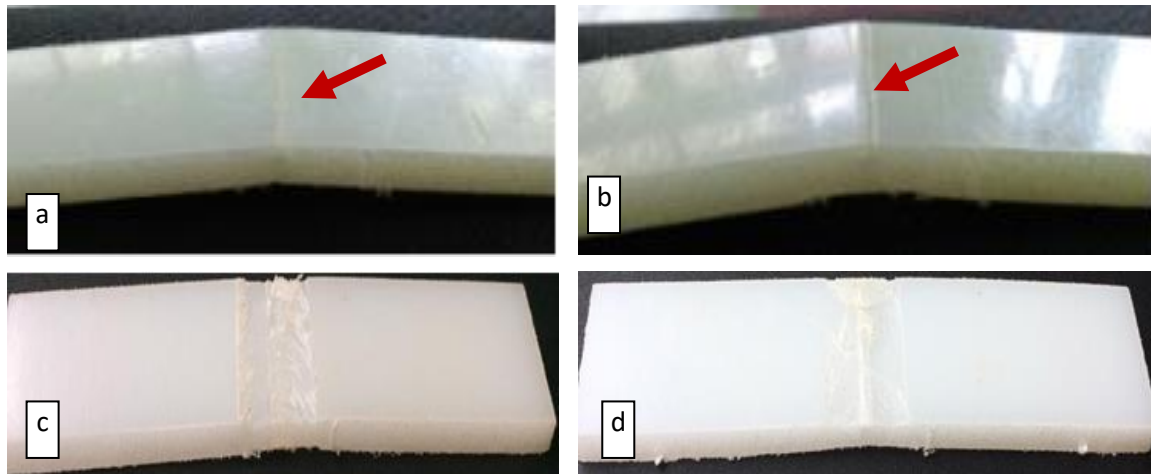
Three-point bending specimen's failures, single-side welding at (a) 900 rpm, (b) 2000 rpm, double side welding at (c) 900 rpm, (d) 2000 rpm.
